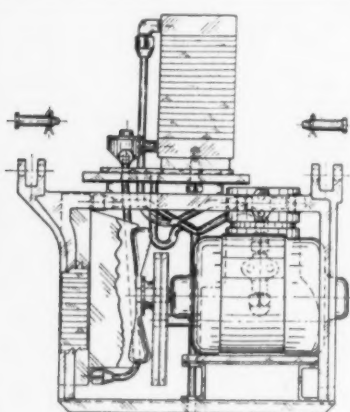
Refrigerating machine in Melcher system. The evaporator for cooling the air extends above the motor and compressor assembly.
